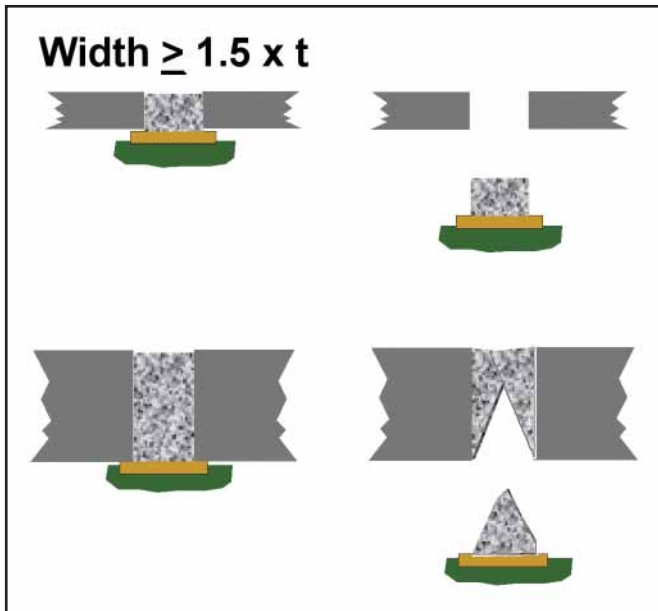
The top figure shows a stencil that complies to the Aspect Ratio Rule resulting in the majority of the solder paste being printed onto the pad. The bottom figure shows a stencil that violates the Aspect Ratio Rule resulting in the majority of solder paste remaining in the stencil aperture (courtesy of Bob Willis)
